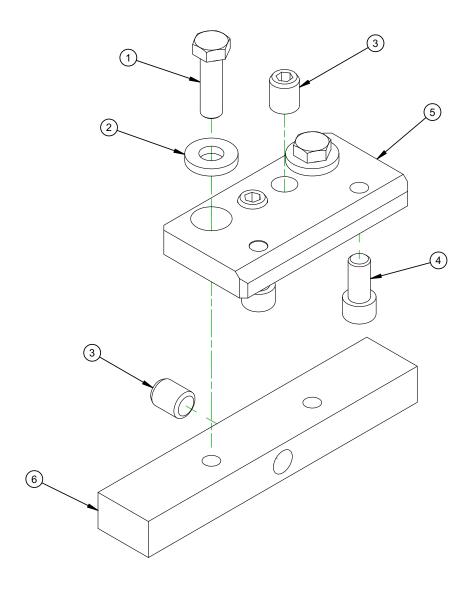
COUNTERWEIGHT ARM ASSEMBLY (P/N 62415)
